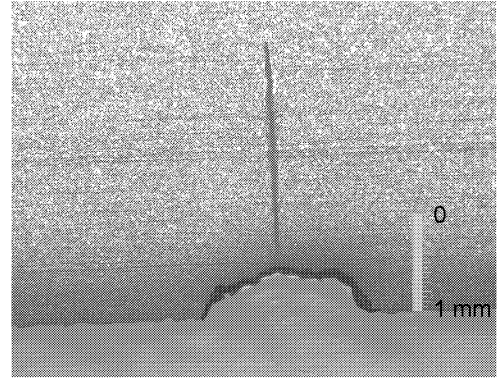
Fatigue crack initiated from pitting. Inner surface shown in Figure 6-17. The crack looks wider in the deepest part of the crack due to more severe etching.
